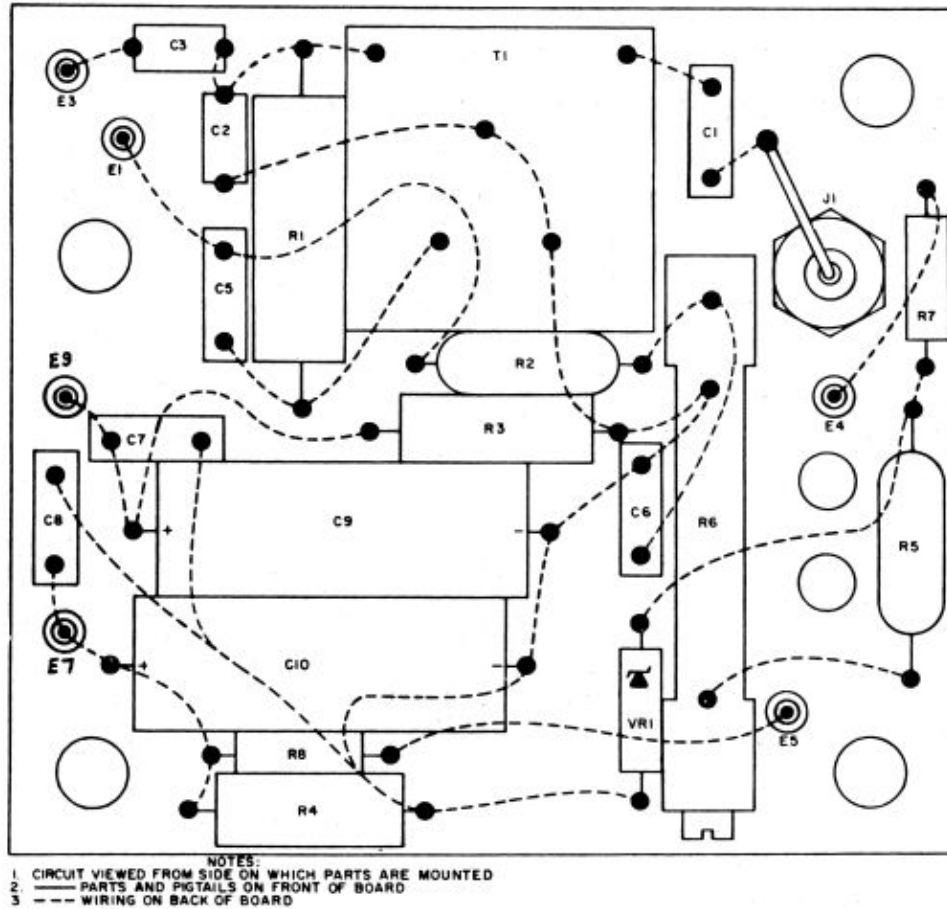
PRINTED CIRCUIT BOARD 2A8A1 - COMPONENT LOCATION (INPUT CIRCUIT - DRIVER ASSEMBLY)
